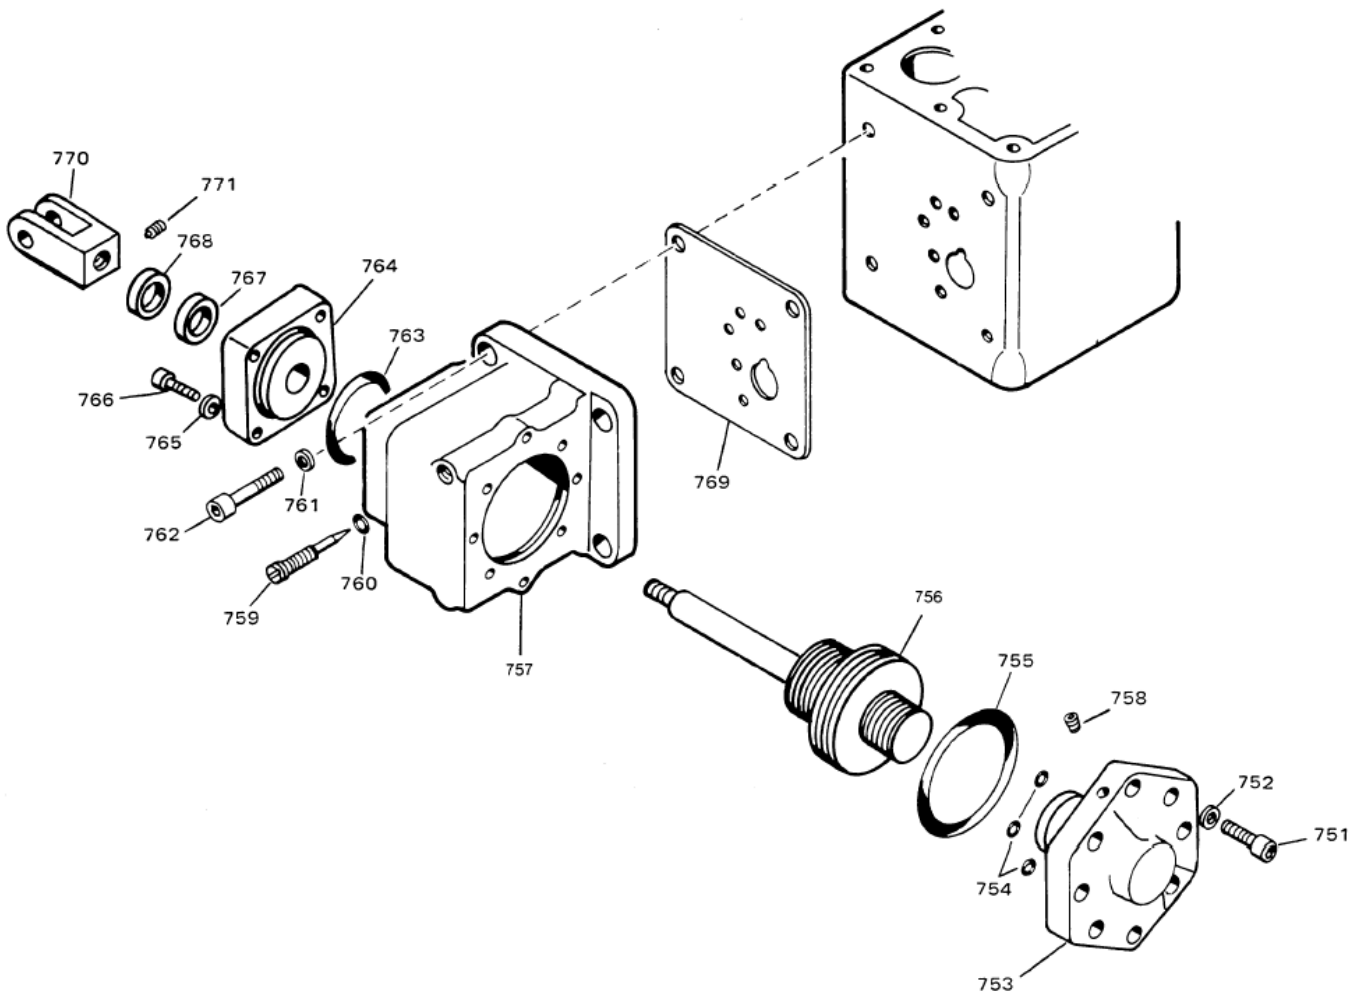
Exploded View of 29 ft-lb (39 J) Power Cylinder (Push)
